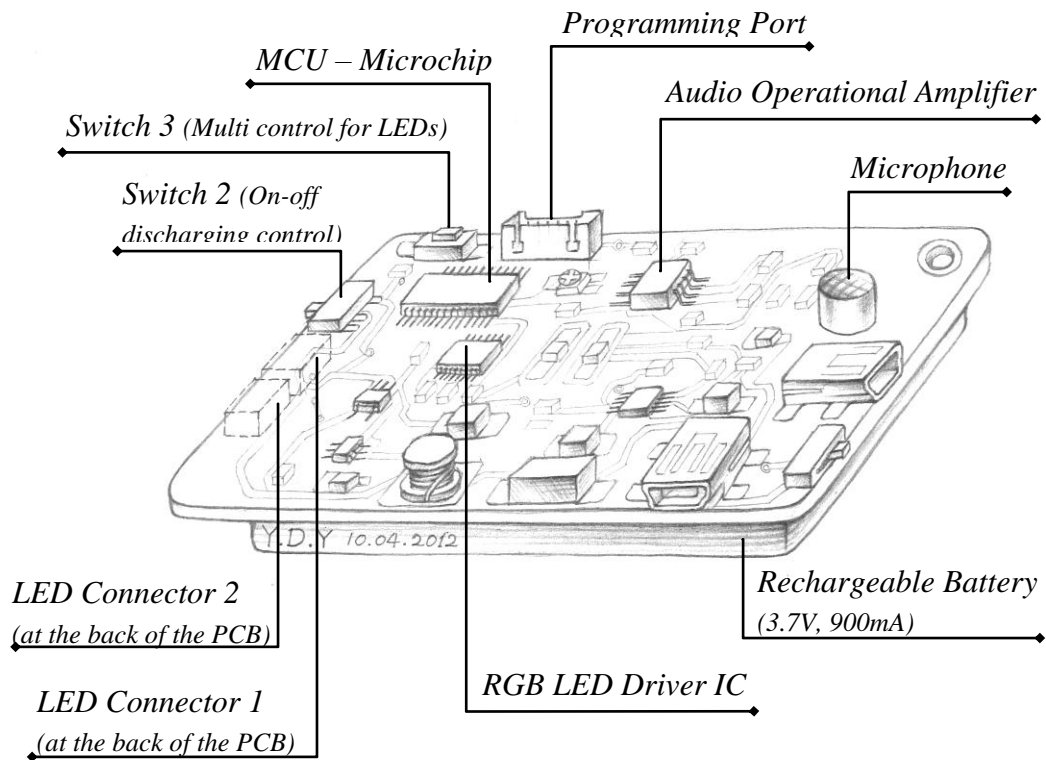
Sketch of the final PCB prototype with the main components for sound controlling and colour changing
